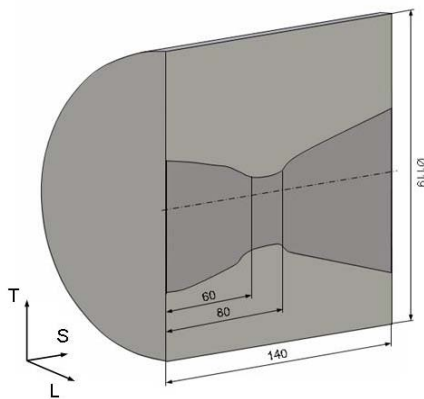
Trepan 1-1 with the location of the welding seam.
